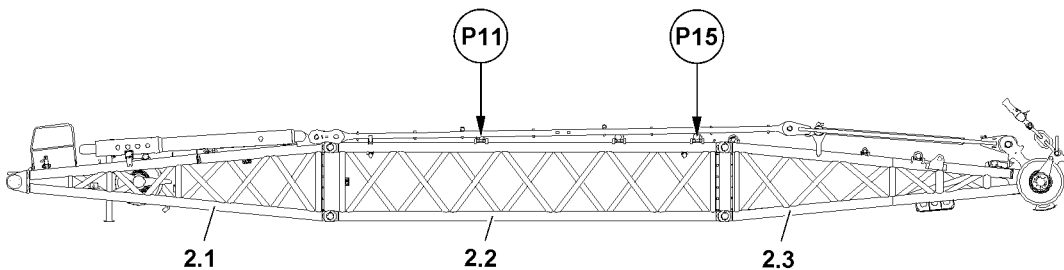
Fastening points for WA-frame 2 completely installed, long version
